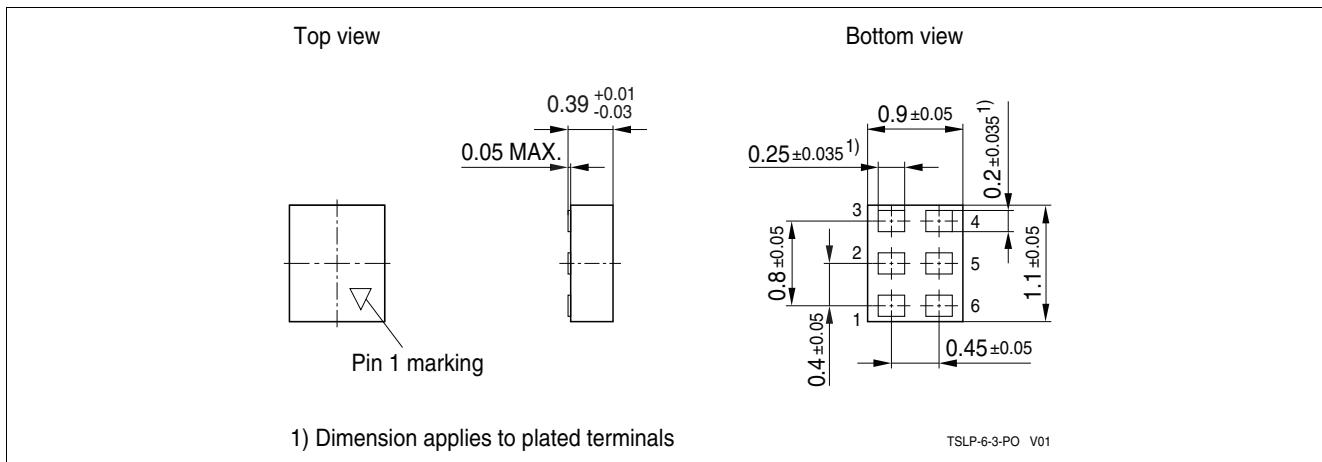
TSLP-6-3 Package Outline (top, side and bottom views)
